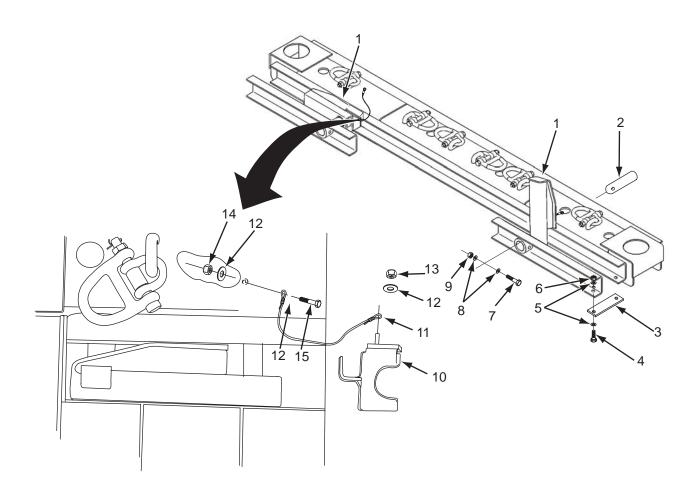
CONTAINER GUIDE ASSEMBLY
